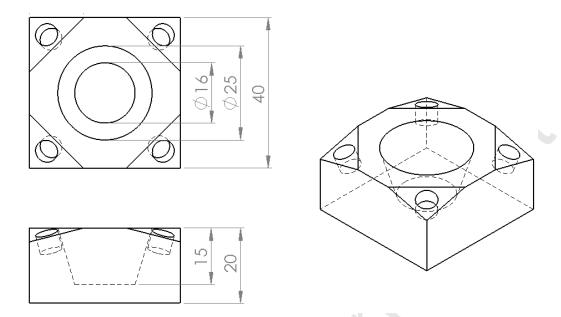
Design of the model used for hybrid FDM and multi-axis machining
